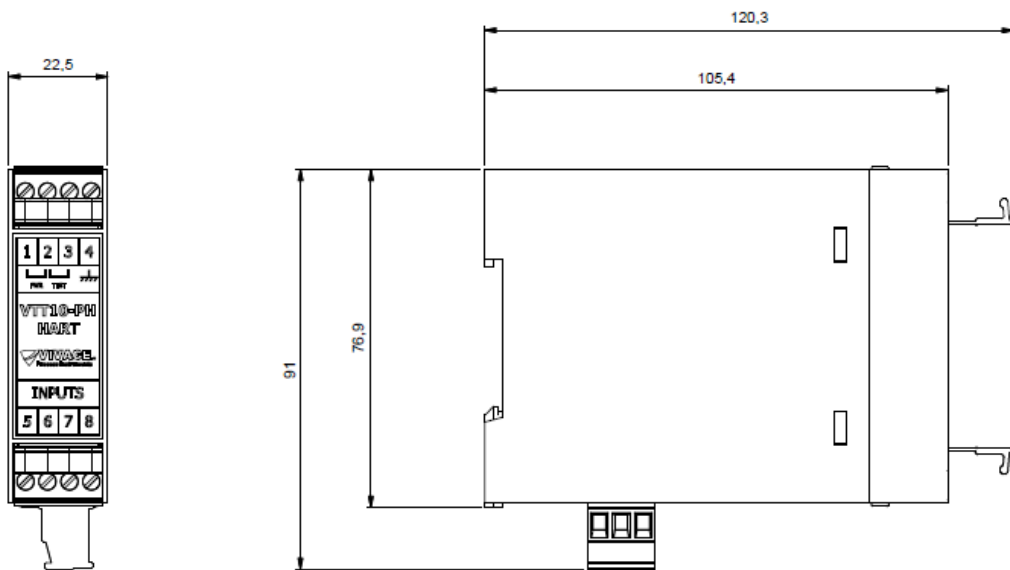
VTT10-PH with open collector dimensional drawing.
